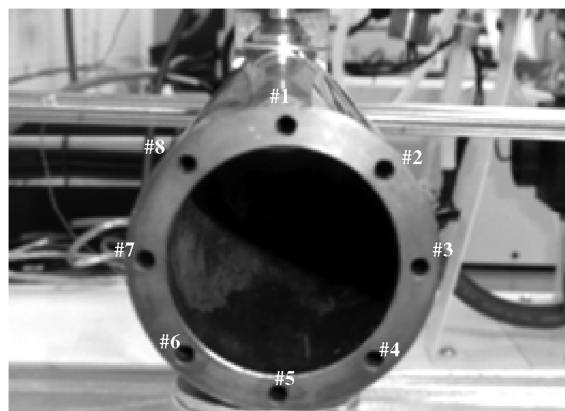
Arrangement of the drilled holes on the test cylinder.
